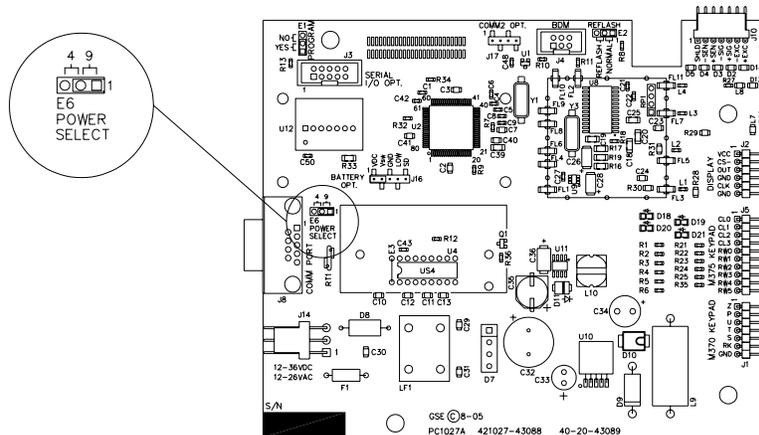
Comm Port 1 Supply Voltage Jumper Location
